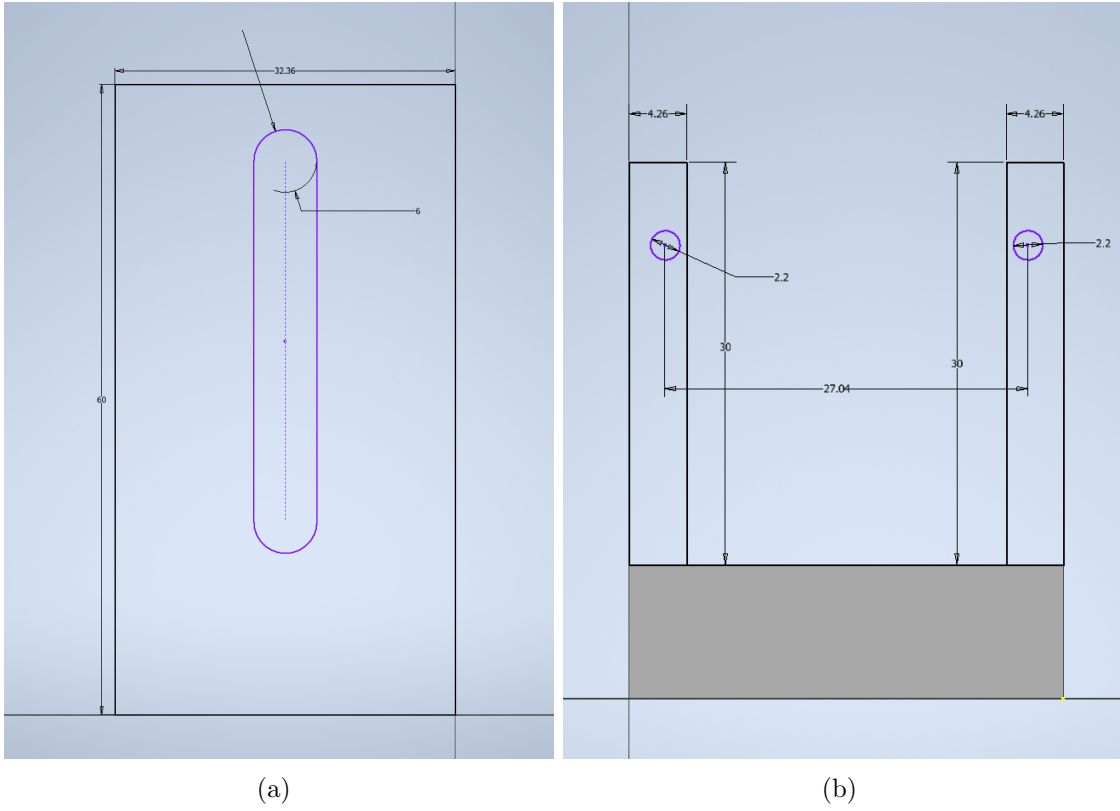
Dimensions and sketches of the piece in Inventor. (a) top view, (b) front view.
